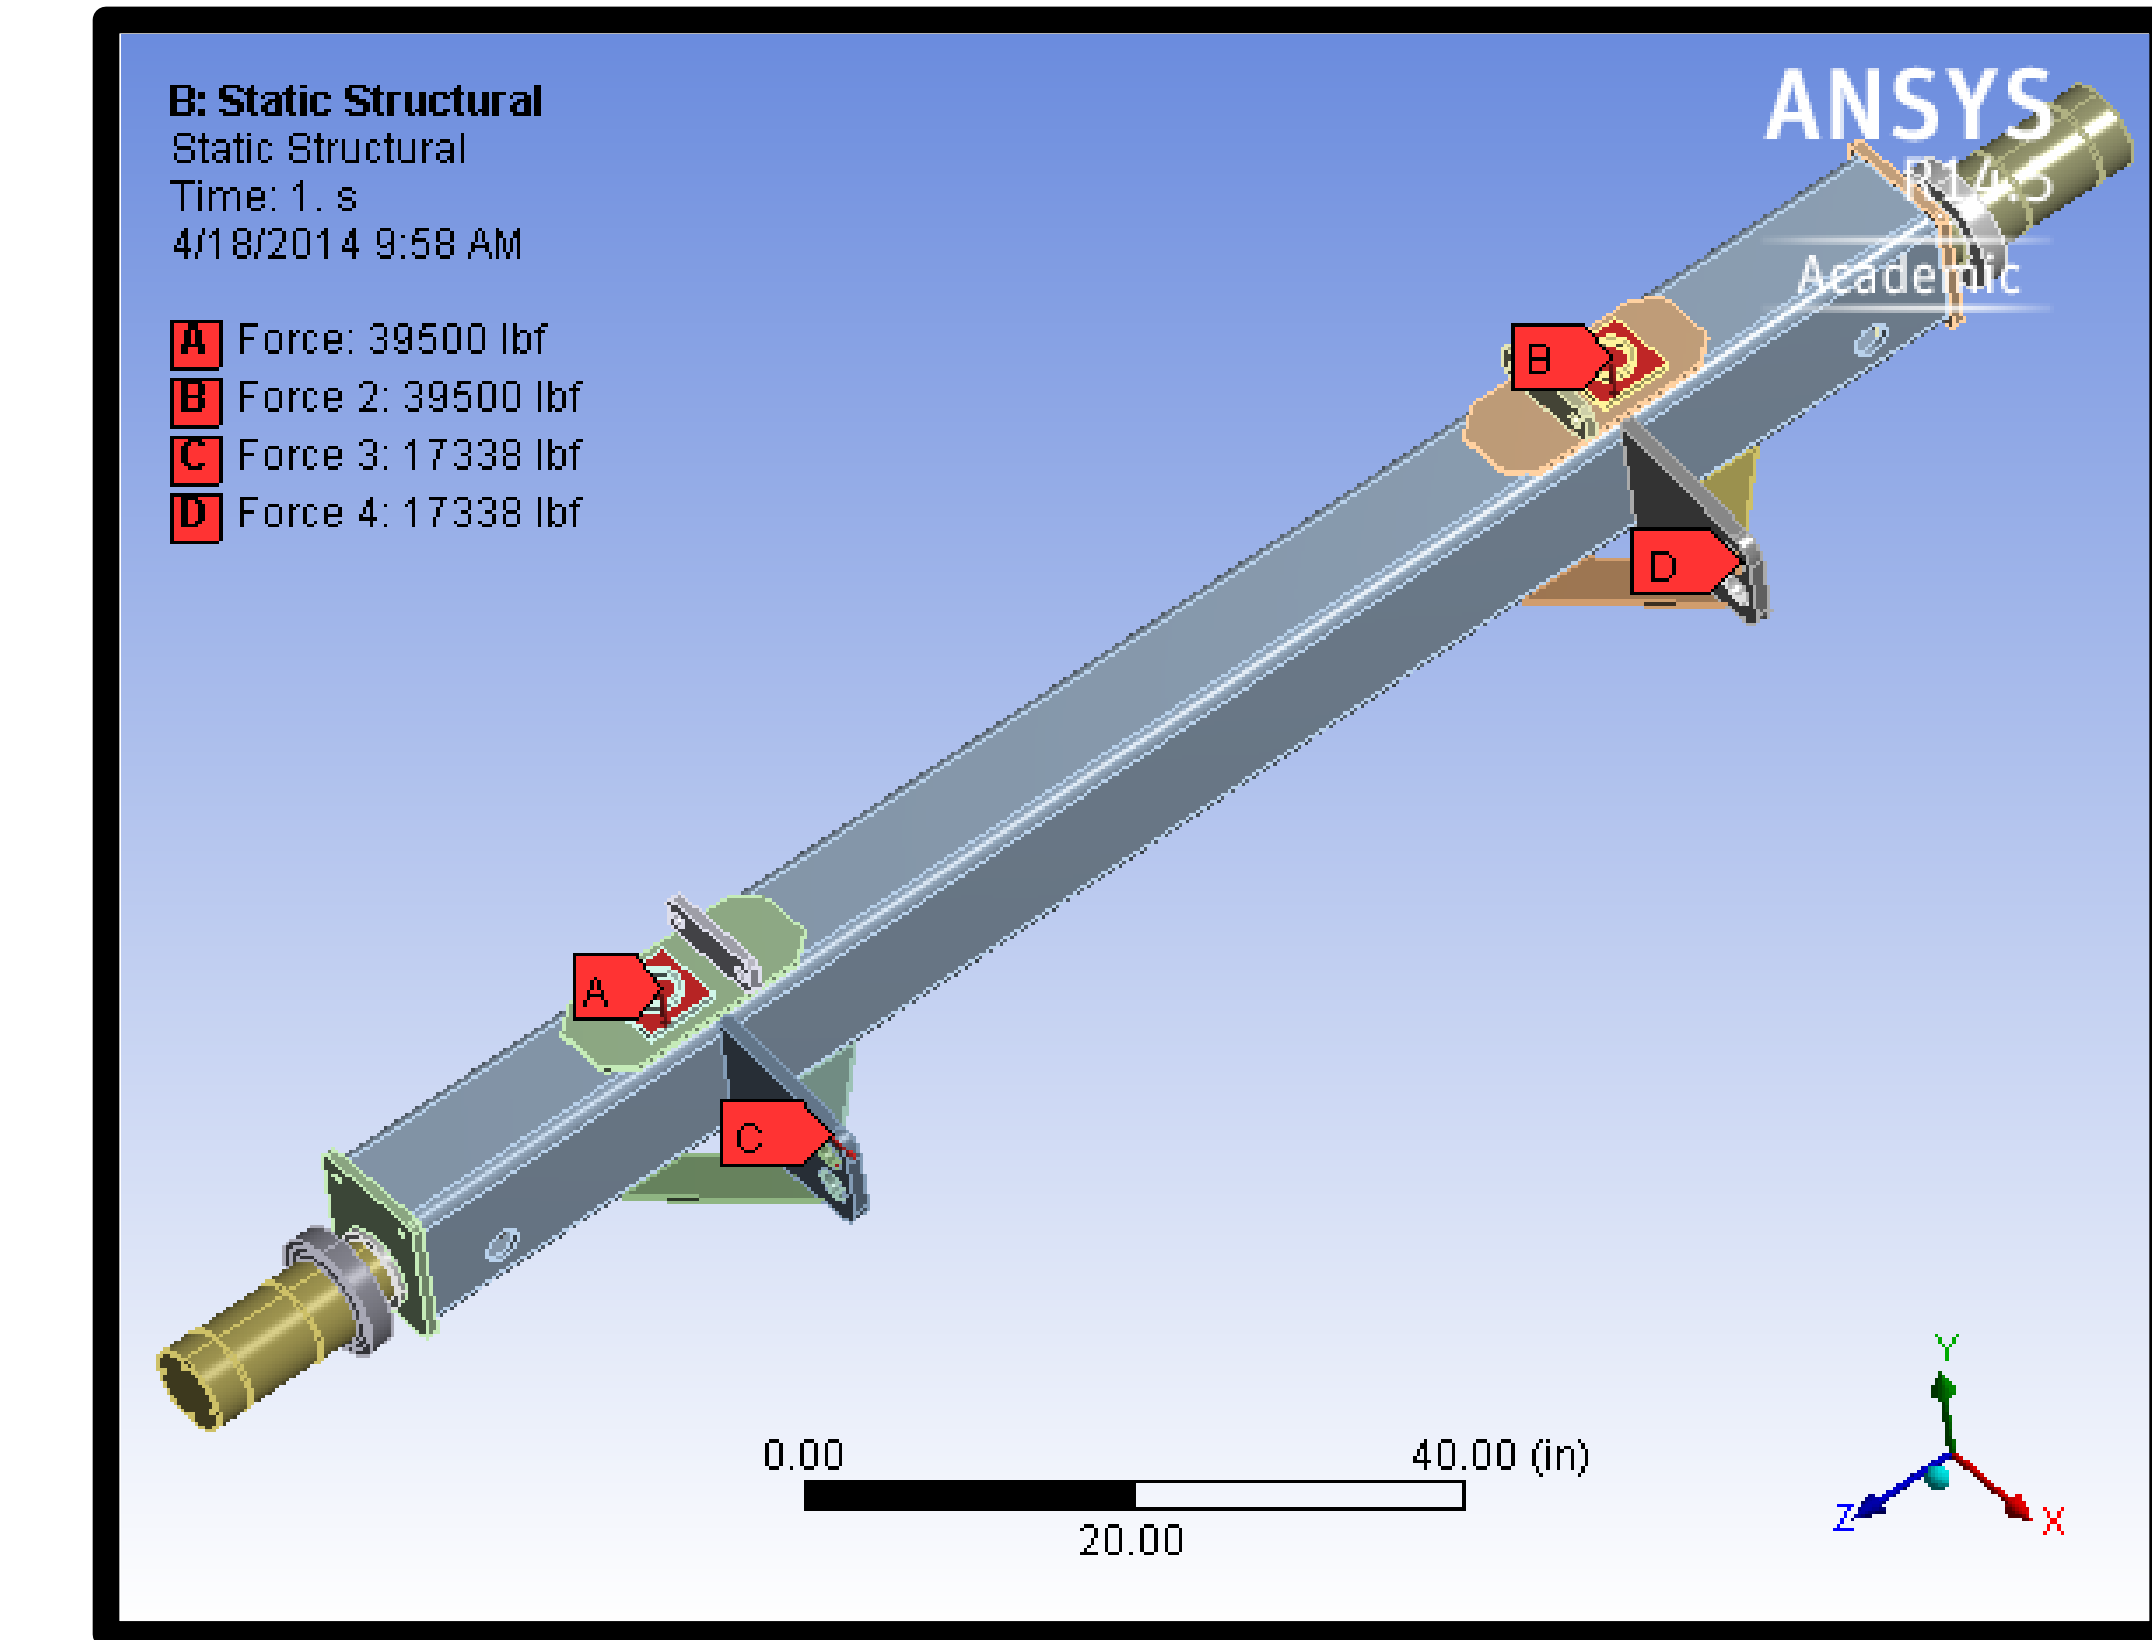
Axle and Spindle Assembly under Loading Scenario 2
